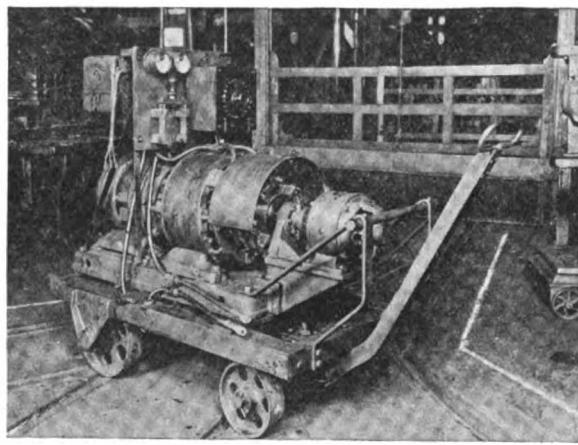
Westinghouse portable arc welding outfit—single operator, 150 amperes.
